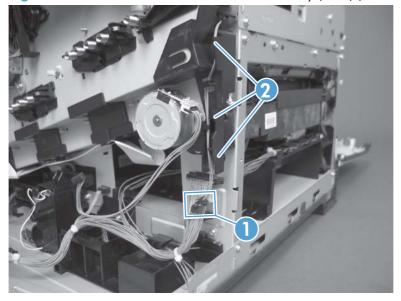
Remove the laser/scanner assembly (Y/M) (2 of 12)
